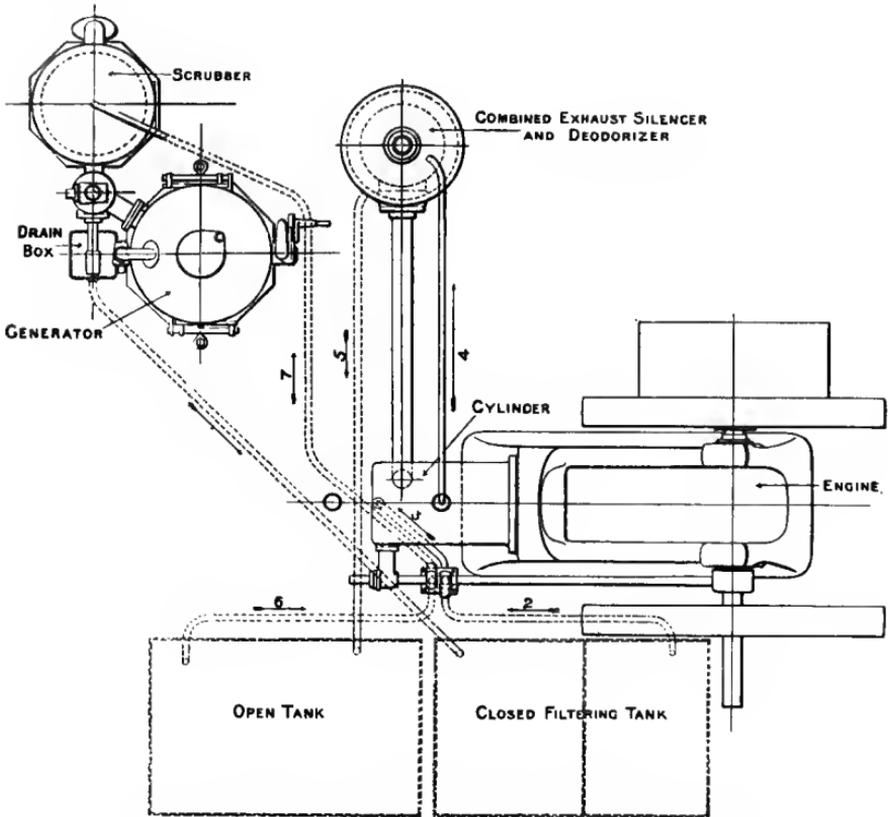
Diagram shewing arrangement of "Deodorizer."
